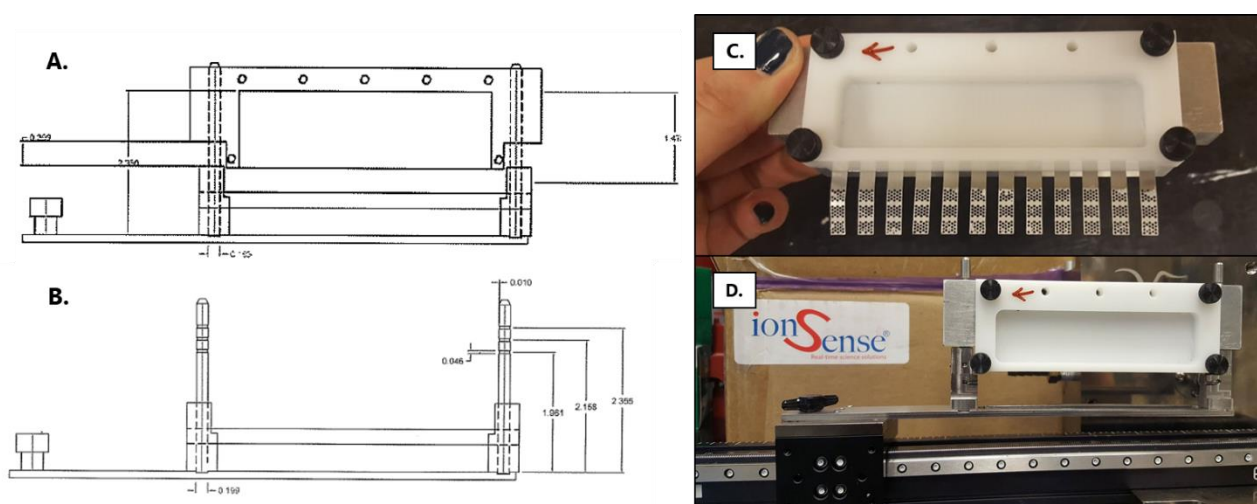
The holder setup for the 96-SPME-TM mesh. Figures A. and B. show the schematic of the holder, with B. showing the "mounting stage". Figures C. and D. show the completed 96-SPME-TM mesh holder, with Figure D. showing the holder immobilised on the linear rail.
